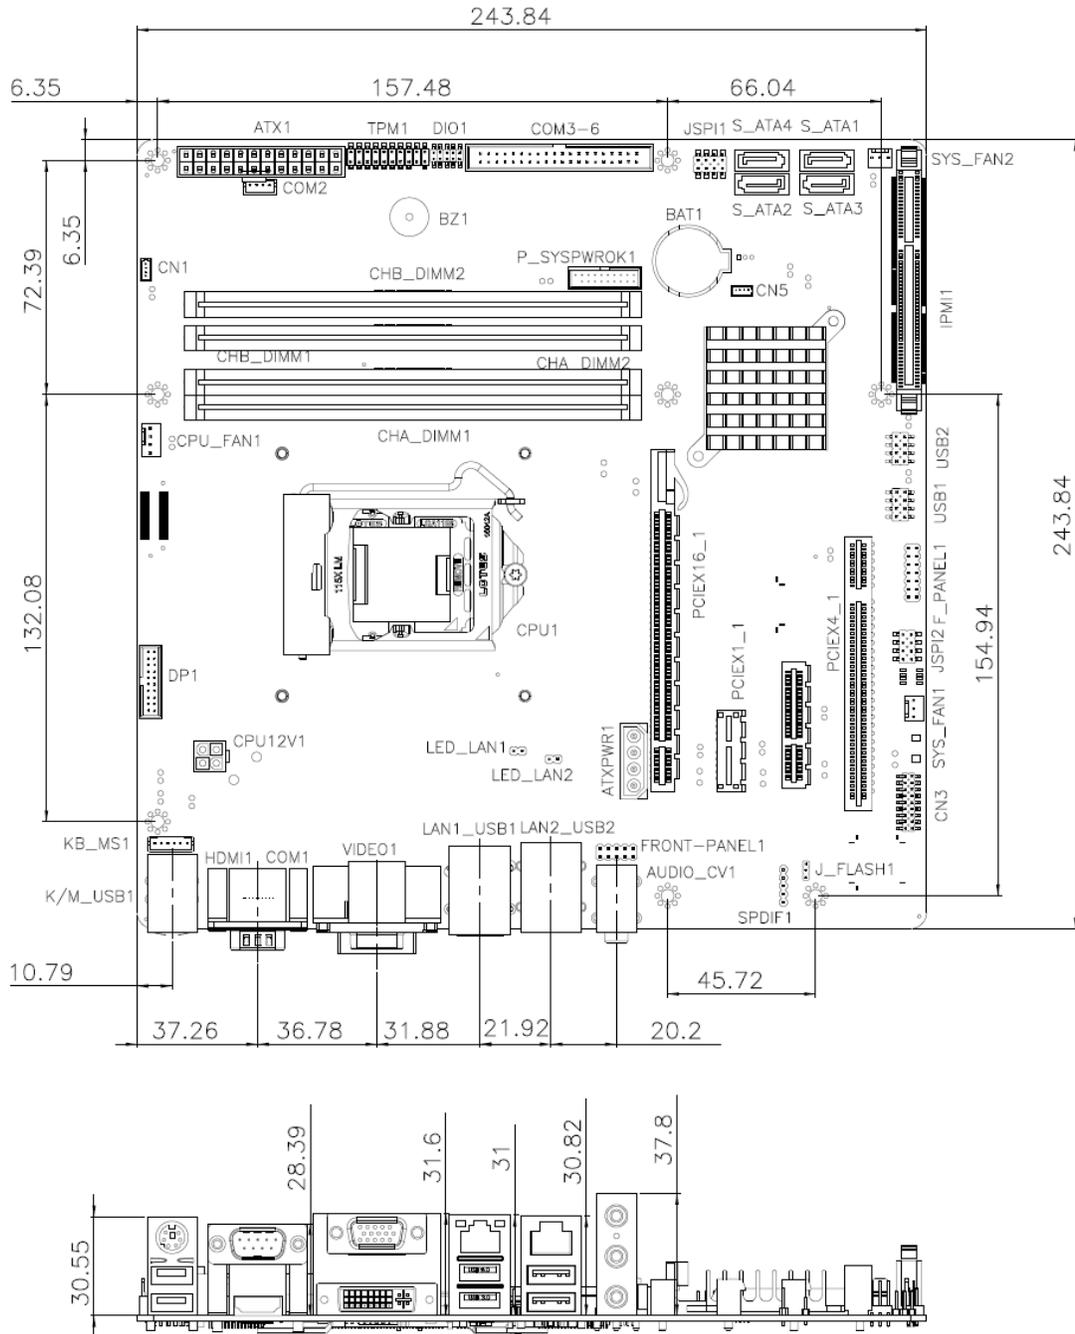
IMB-Q870-i2 Dimensions (mm)
